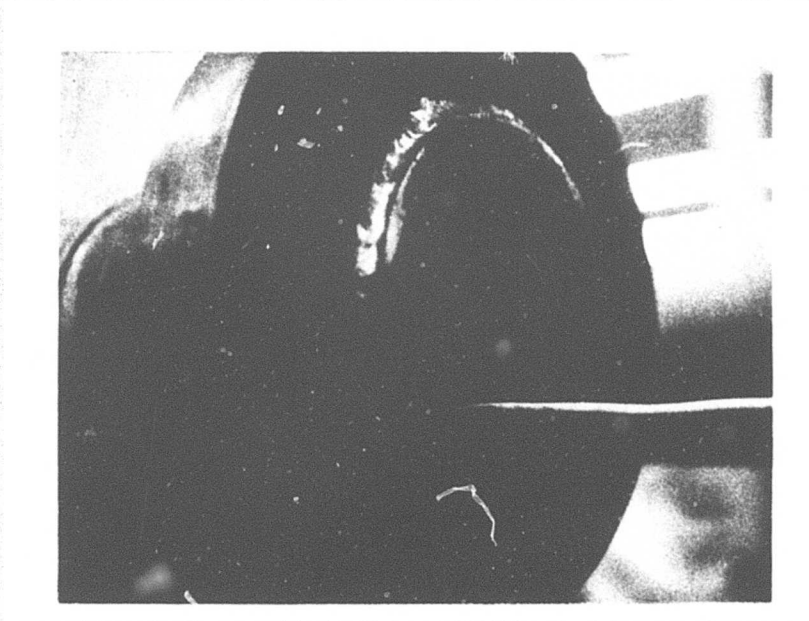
Cable-gripper box disc showing inside weld to 4-in. conduit.
